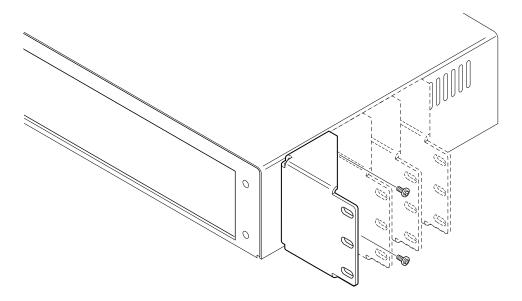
Attaching Mounting Flanges for the 23-inch Equipment Racks
